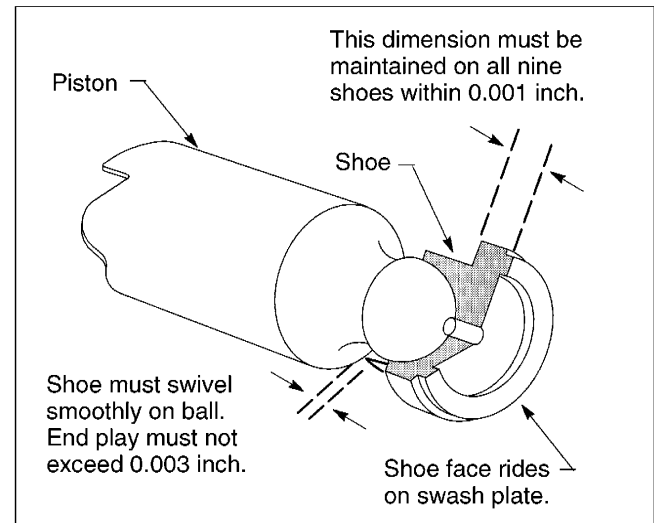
Piston and Shoe Assembly Tolerances
